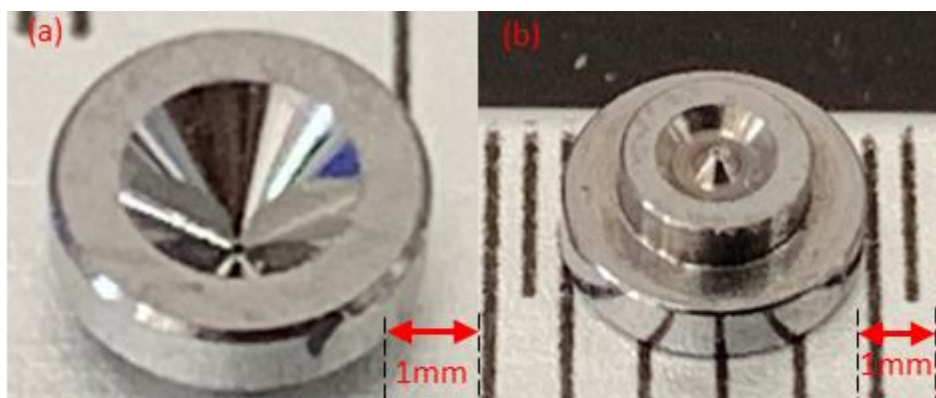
Tungsten Carbide nozzle (a) top view (b) bottom view.
